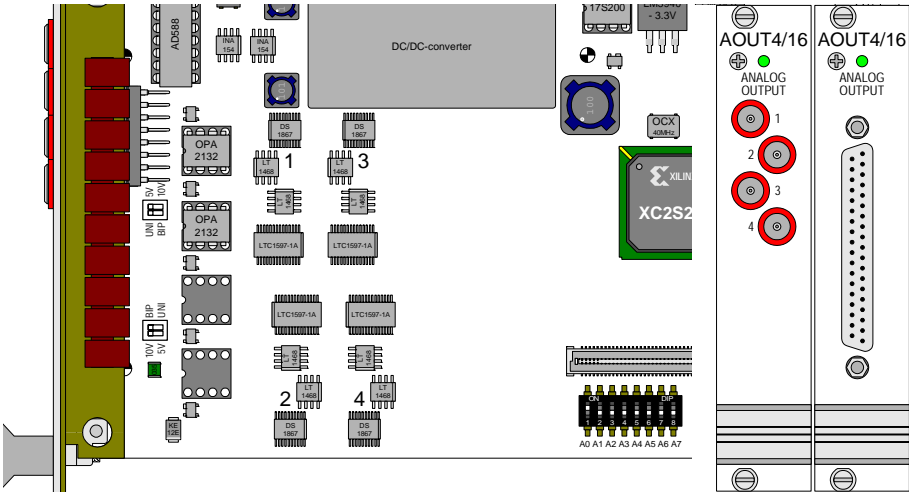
Pro-AOut-4/16 REVC: Printed circuit board (detail) and front panels
